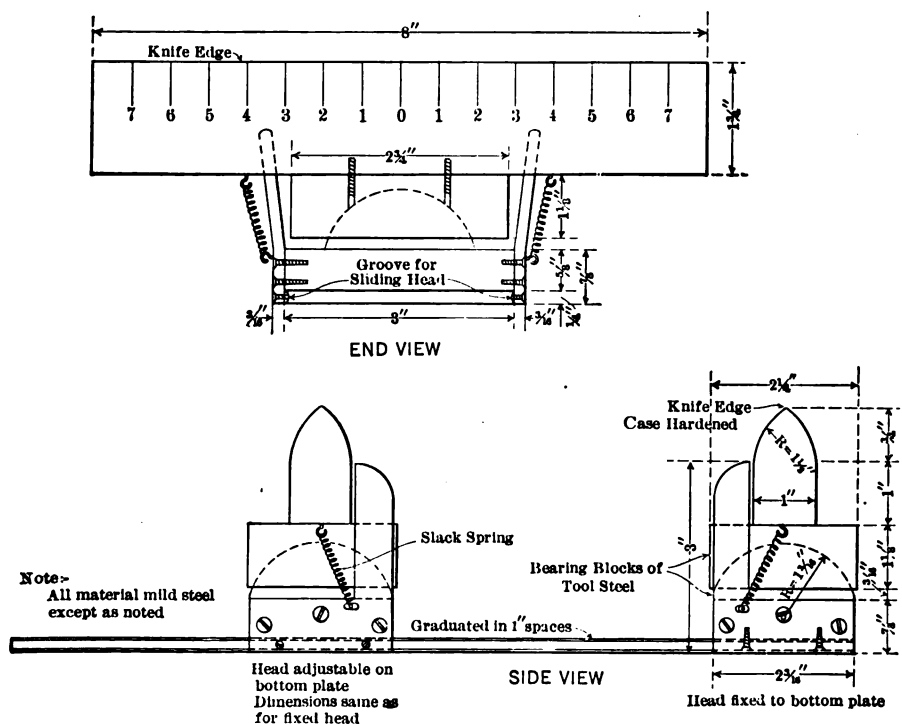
Knife Edges with Spherical Bearings for Cross-bending Tests on Brick.
